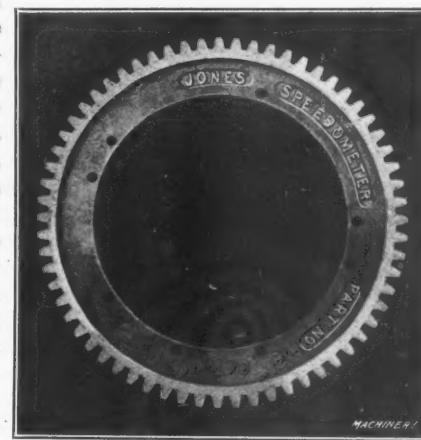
Gear on Front Wheel of the Car, which drives the Speedometer
